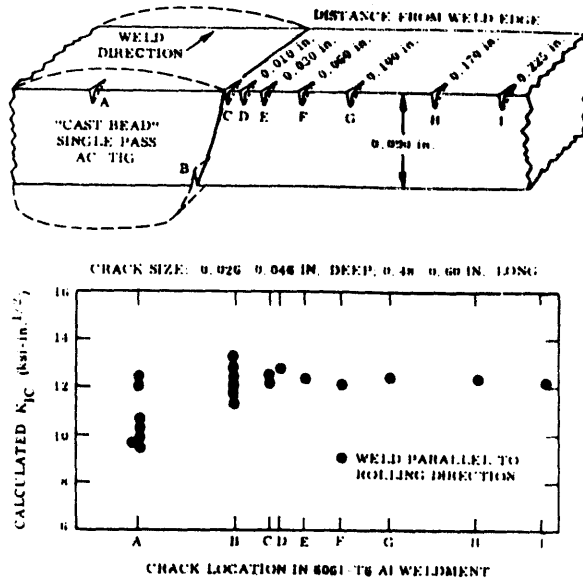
Fracture Toughness in an A.C. TIG Weld, "Cast" Into Backup Groove
